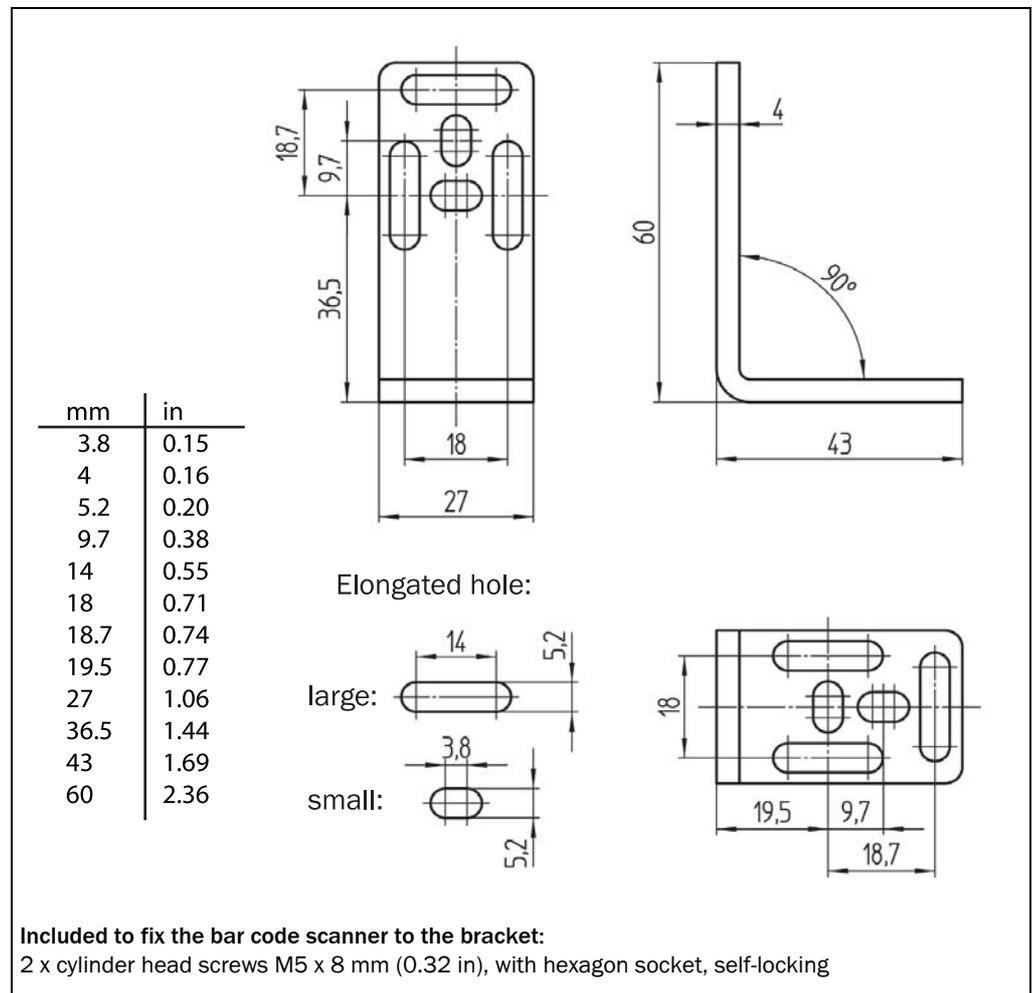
Dimensions of the fixing bracket no. 2020410
